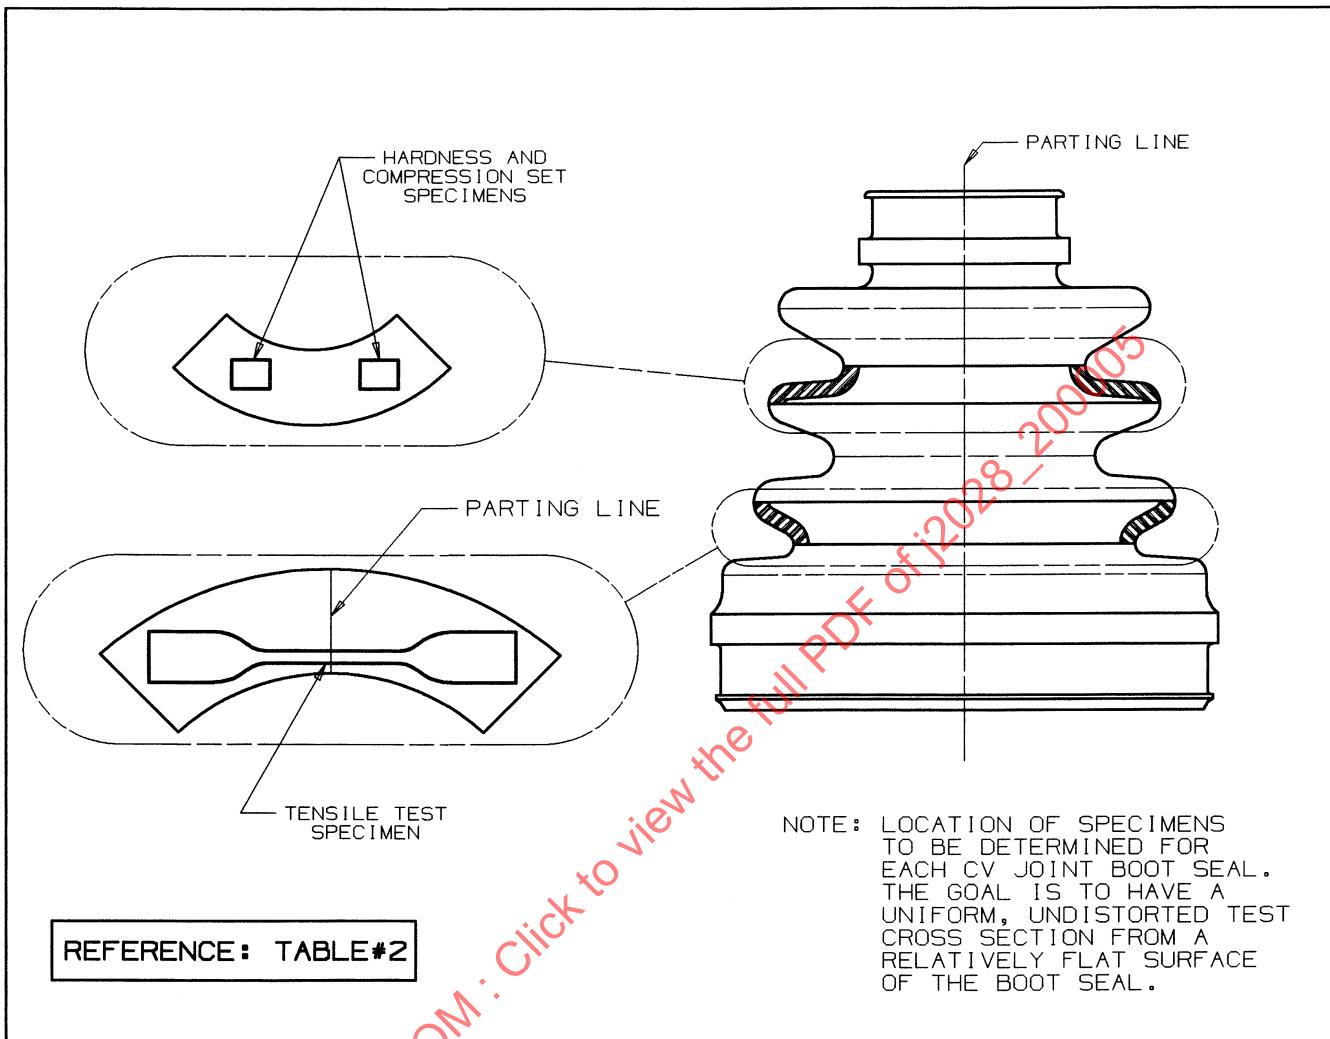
TYPICAL AS MOLDED SPECIMEN SOURCE—RUBBER BOOT SEAL
